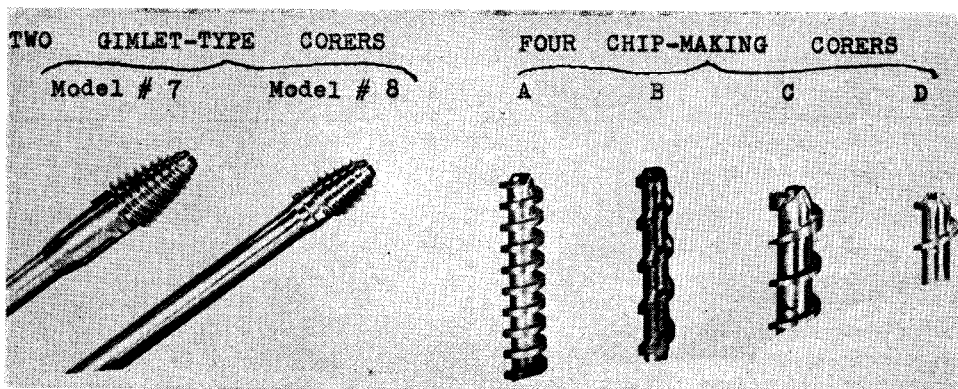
Cutter-heads of original design. Two at left for cutting soft wood; four at right for cutting and removing chips in hard wood.
